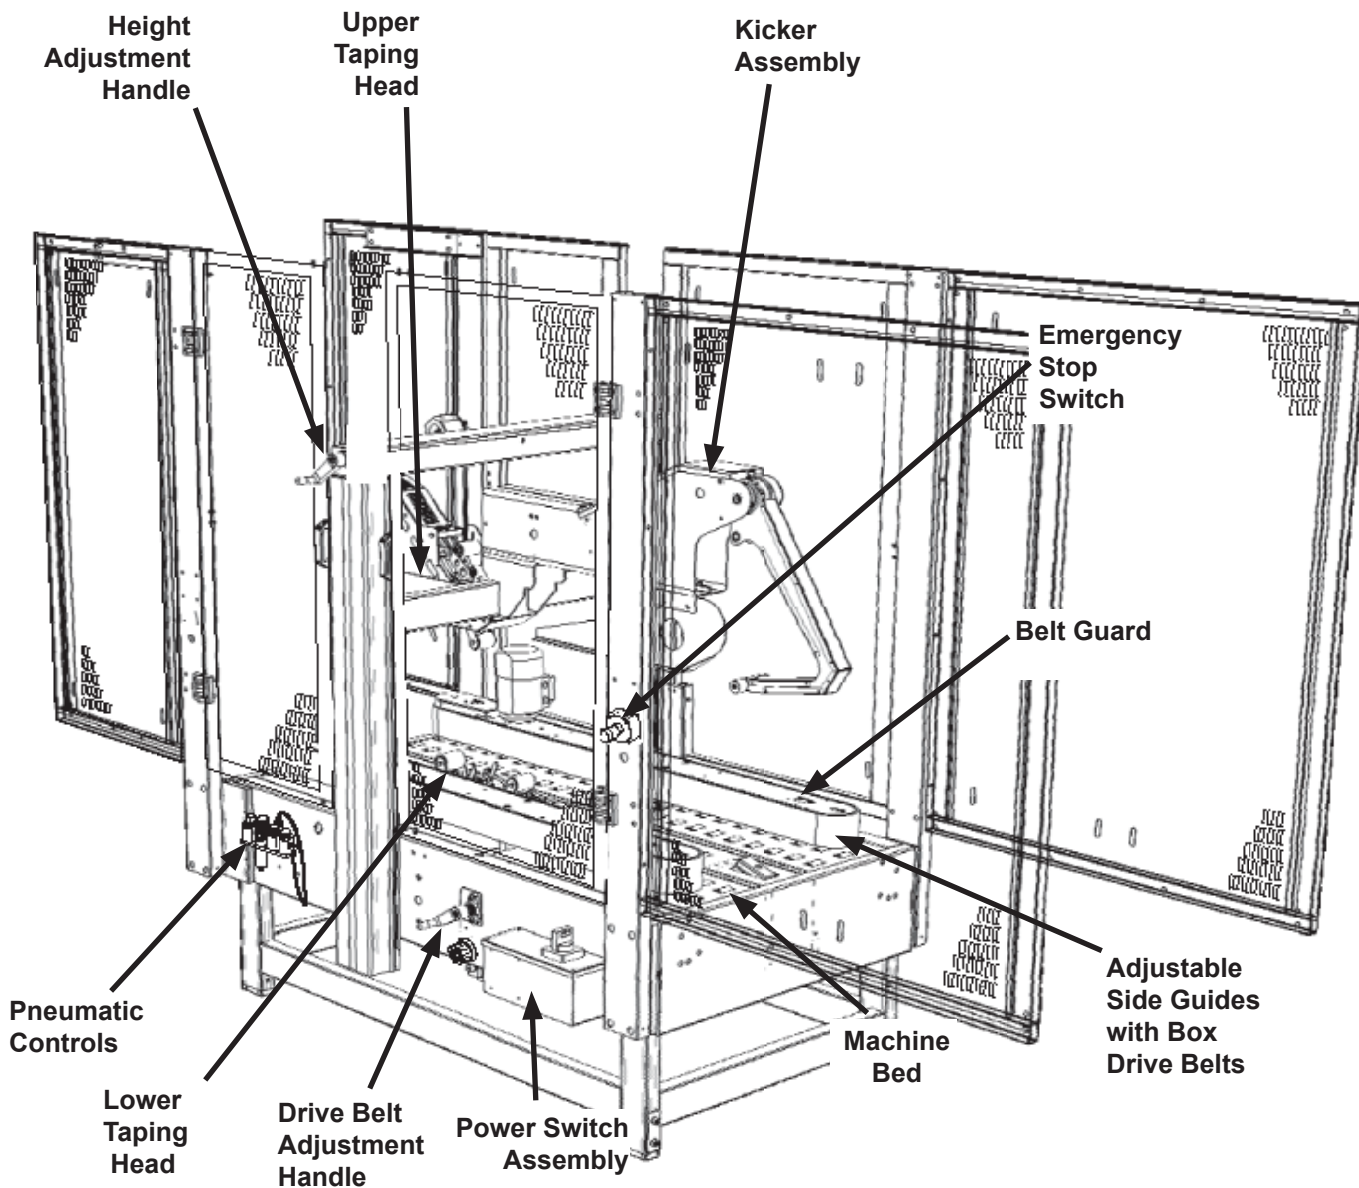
a80f Case Sealer Components (Left Front View)
